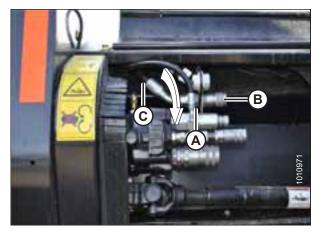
Auger and Reel Pressure Coupler and Hose – 4.3 m and 4.9 m (14 ft. and 16 ft.) Header Shown
